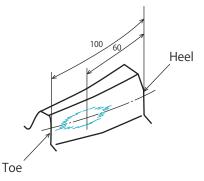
Tooth bearing for Bevel gear with Crowning.
